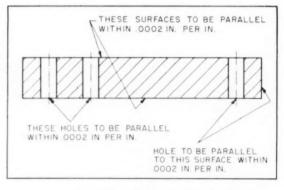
Tolerances relative to parallelism are specified by notes.
